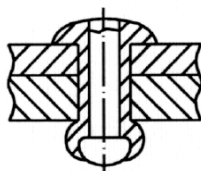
Figure ZZZ: Cross-section of structural blind rivet joint with flush break mandrel and expanded blind head. Note that different mandrel retention methods and both folding as well as expanding sleeves may be used.
